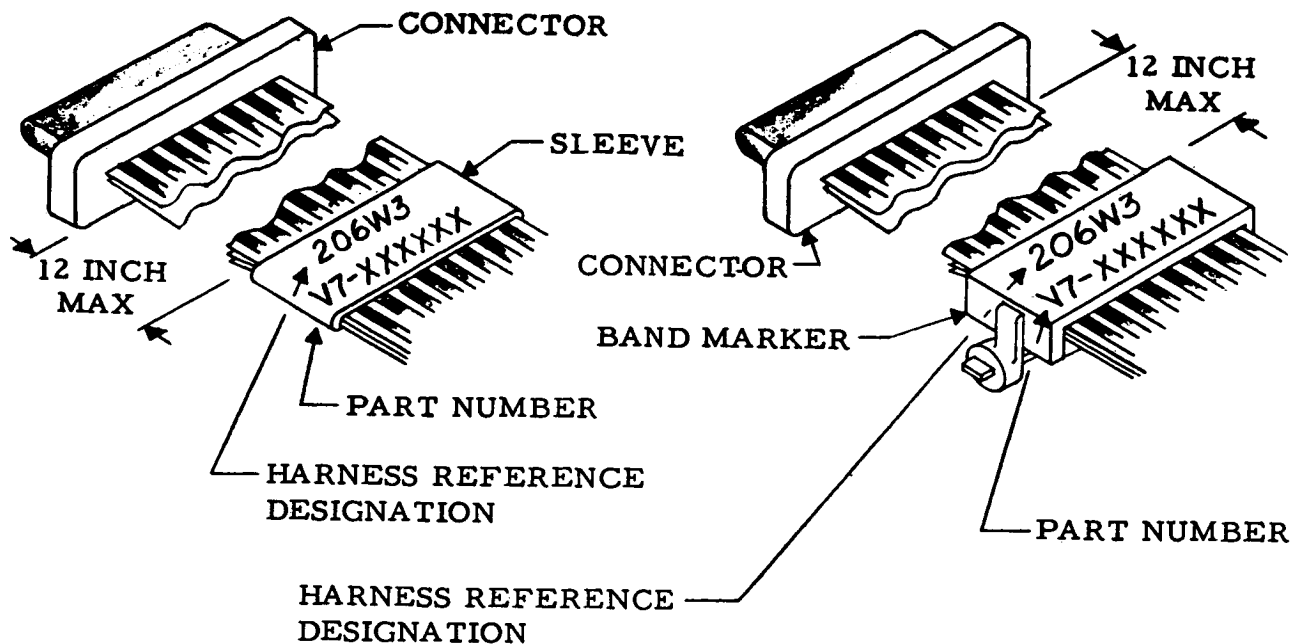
IDENTIFICATION OF HARNESS ASSEMBLY
